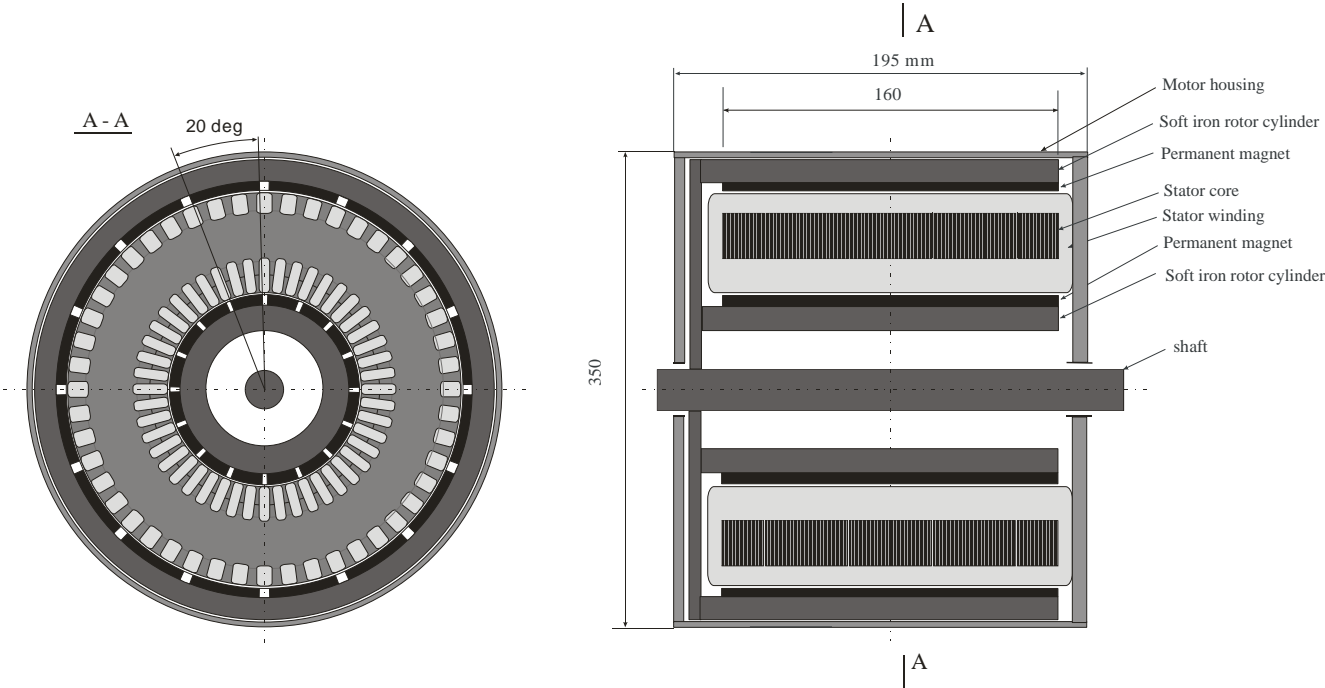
Cross-sectional view of the RFTWTRPM motor [11].
